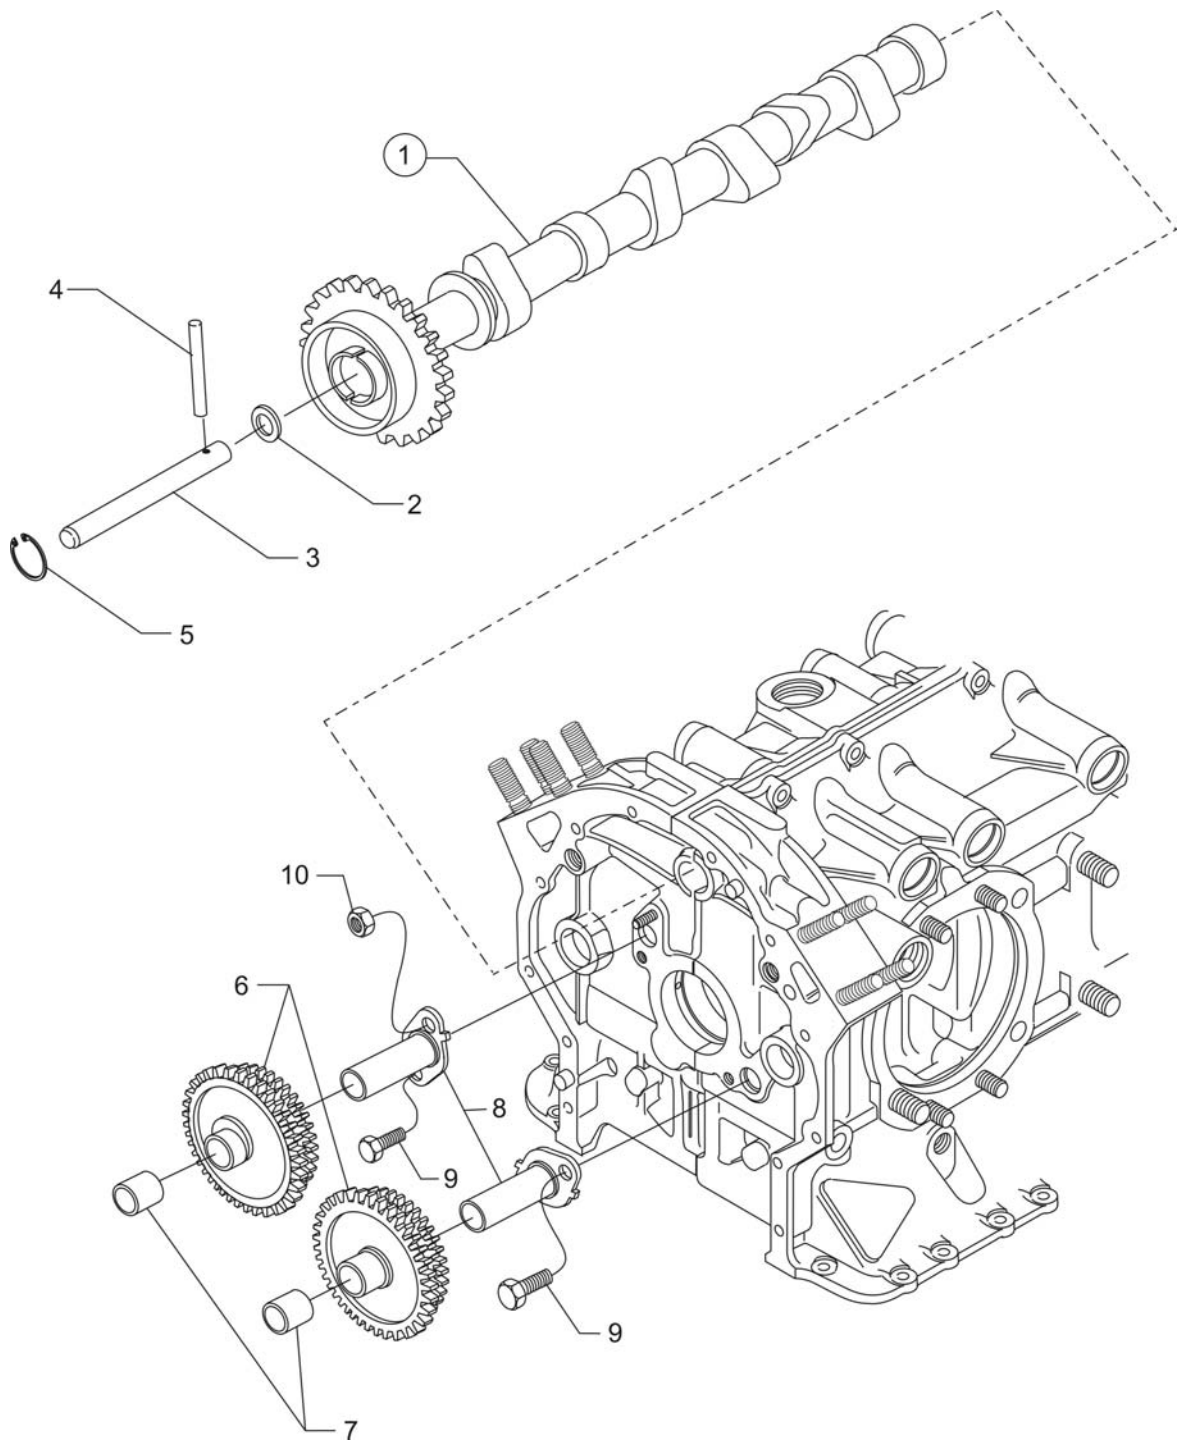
CAMSHAFT, TACHOMETER DRIVE AND CRANKSHAFT IDLER GEARS
